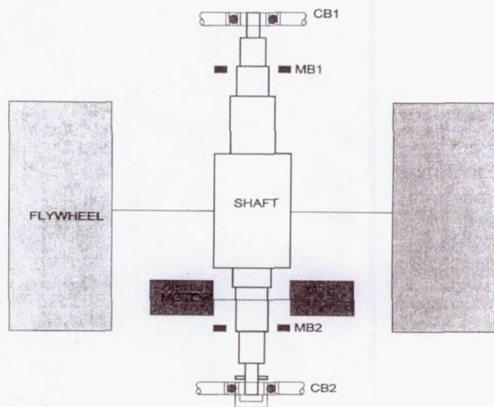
VERTICAL ROTOR SHAFT WITH FLYWHEEL, MOTOR AND MAGNETIC AND CATCHER BEAGINGS.
